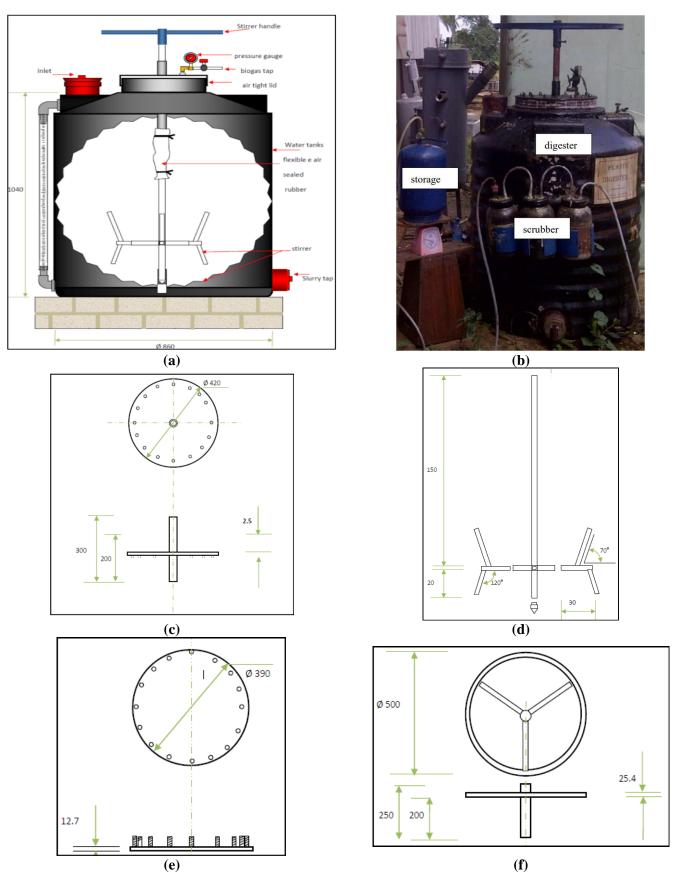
The plastic biogas digester (a) drawing; (b) after construction; (c) metal cover; (d) stirrer; (e) metal cover holder; (f) stirrer handle.
